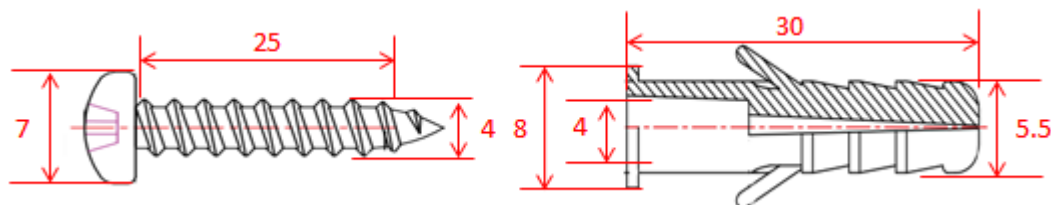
Screw Dimension(in mm) View for AP-MountKit-T1 Bracket Installed on the Wall
